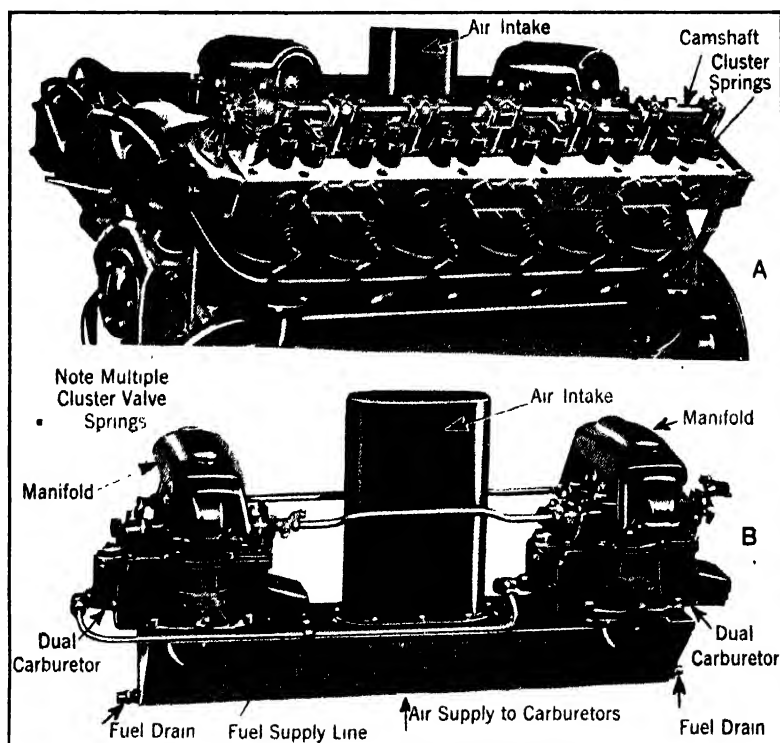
View at A Shows Packard Valve Gear with Overhead Camshaft and Multiple Cluster Springs. B Shows Carburetor Joined to Common Air Intake Castings with Vertical Intake Stack. Each Carburetor Carries an Induction Pipe by which it is Coupled to Valve Housings.
